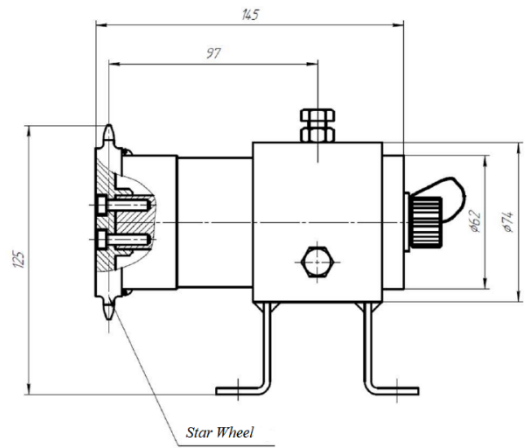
Overall drawing of the DPS-140(A) with star wheel
